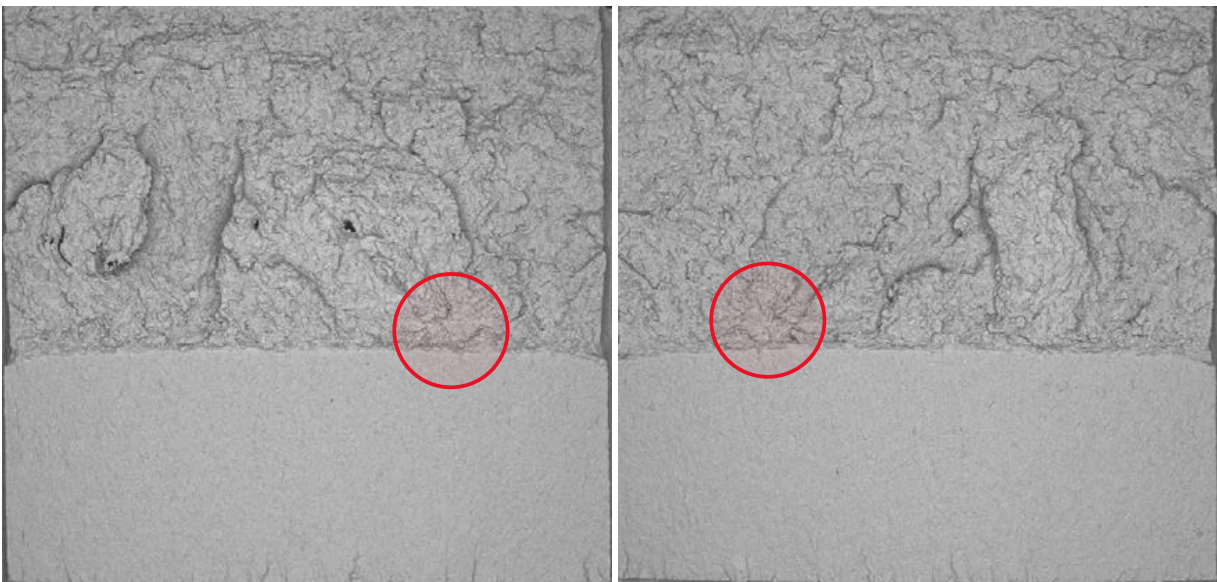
Left and right fracture surface of unirradiated SE(B) specimen B1C.9.6, showing predominantly cleavage fracture. The approximate primary cleavage fracture initiation region is marked by a red circle. The test temperature was -90°C and the fracture toughness was rather high $198.8 \text{ MPa}\sqrt{\text{m}}$ and the initiation site lies quite far from the fatigue crack tip. Cleavage initiation occurs in a region without special features. No finding related to inclusions are reported.
